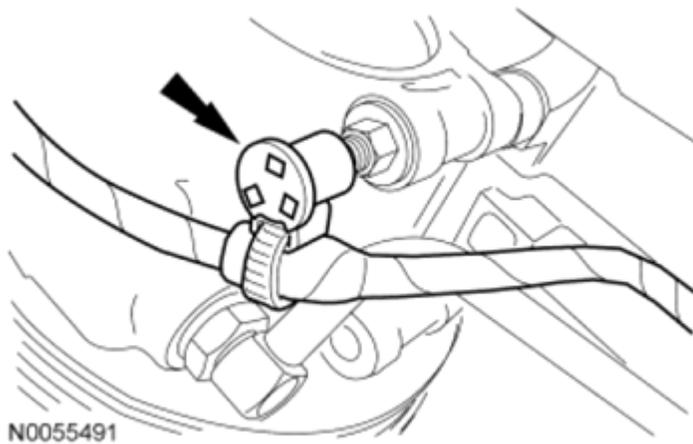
Locating Engine Wiring Harness And Power Steering Pump Stud Bolt
